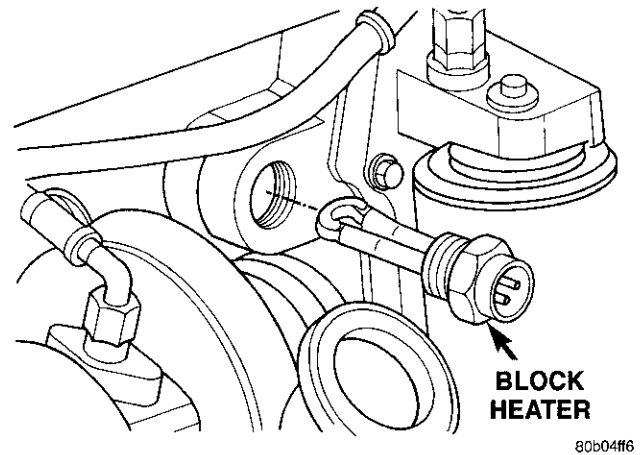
Engine Block Heater—5.9L Diesel Engine
